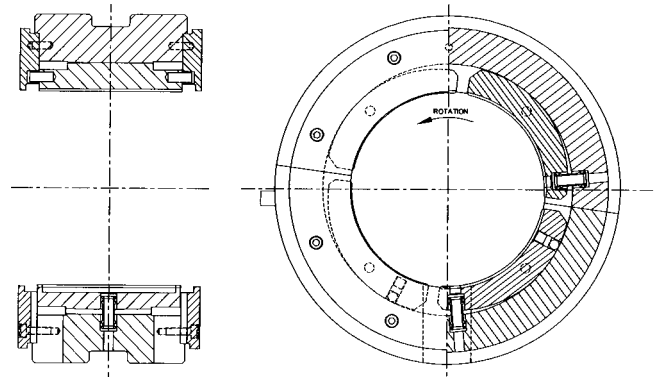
Leading Edge Groove Tilting-Pad Journal Bearing.
